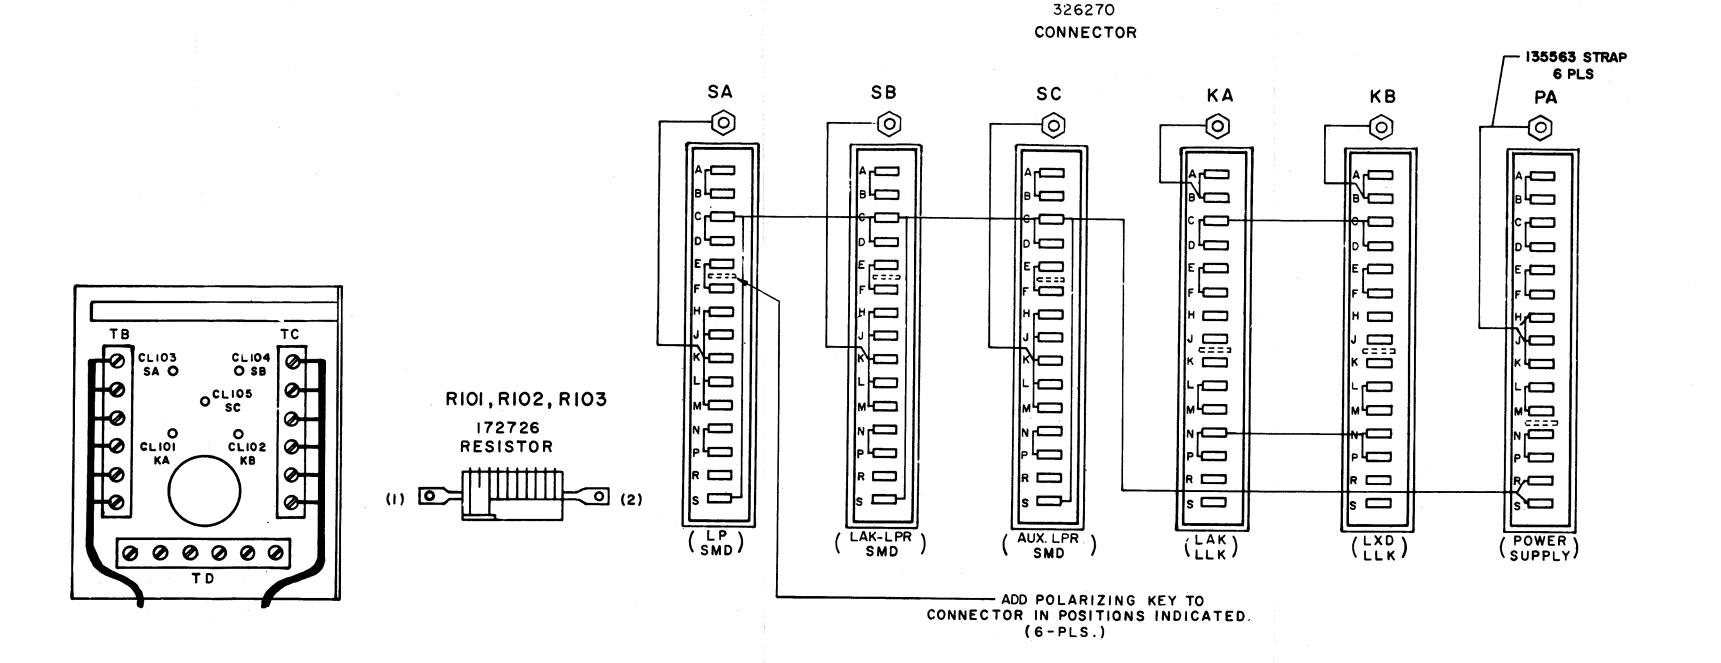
323815 Electrical Service Assembly (Signal) Wiring Diagram (Sheet 2 of 5)
